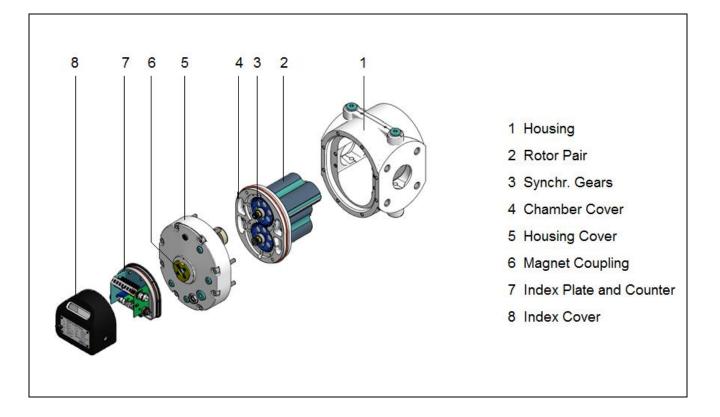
Exploded view of the OMEGA VI DN80 (3")
